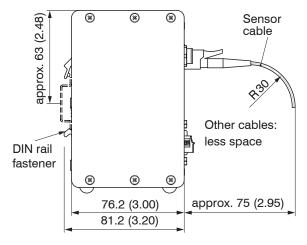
Dimensional drawing side view, controllers IFC2421/2422/2465/2466, dimensions in mm
